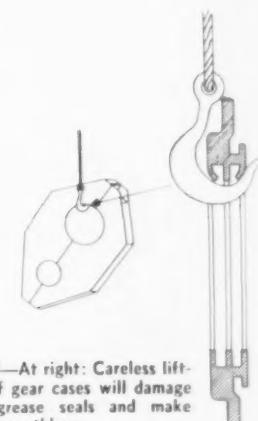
At right: Careless lifting of gear cases will damage the grease seals and make them worthless.
